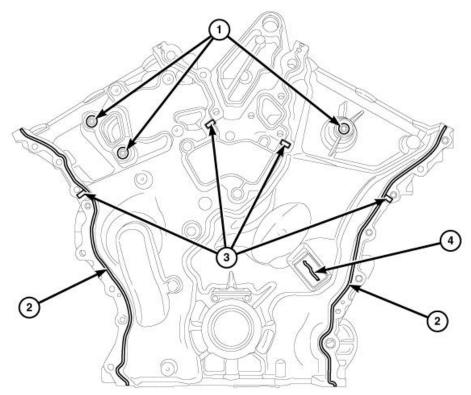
Sealant At Cylinder Head Bosses, Right & Left Flanges, Cylinder Head-To-Engine Block
